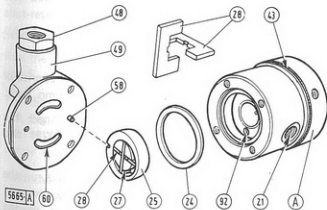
Transfer Pump, Hydraulic Head and End Plate
